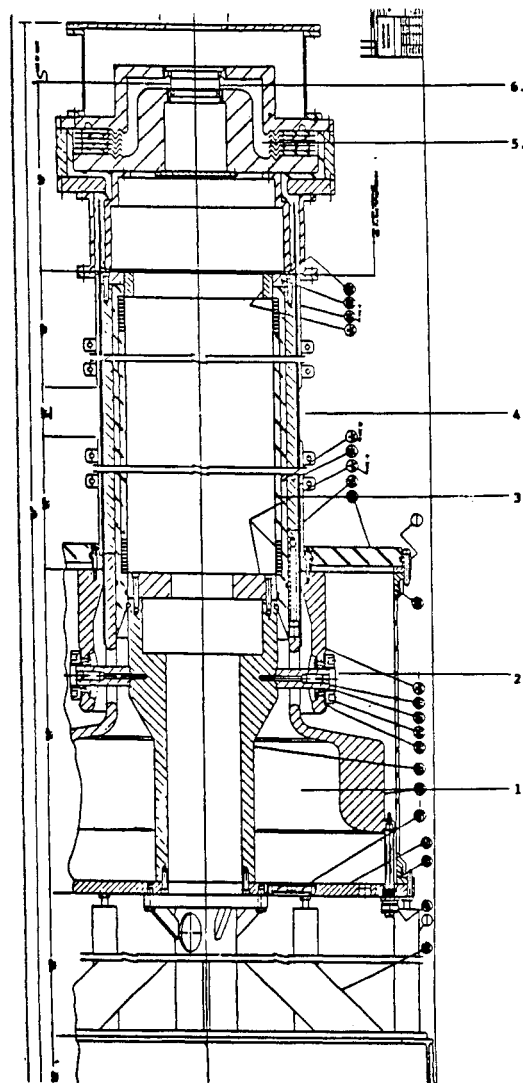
Blueprint of the tower (upright) portion of the Laguna system: (1) storage inductance; (2) posthole convolute region; (3) explosively formed fuse; (4) surface discharge closing switch; (5) vacuum powerflow chamber; and (6) foil load.
